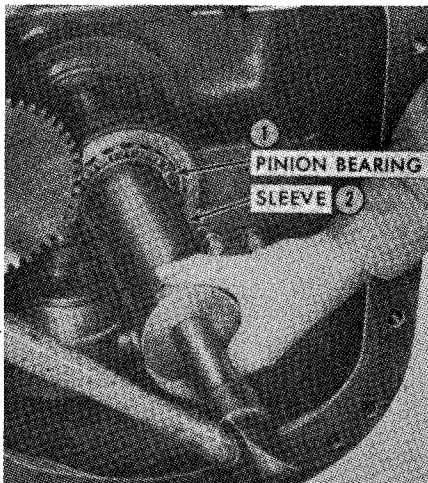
With pinion supported as shown in Fig. 175, install front bearing cone with proper sized sleeve driver as shown.
